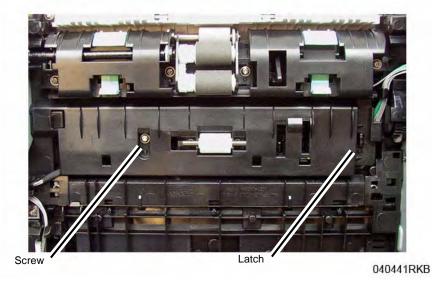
Feed and Reg Sensors PWB Cover (Bottom View)
